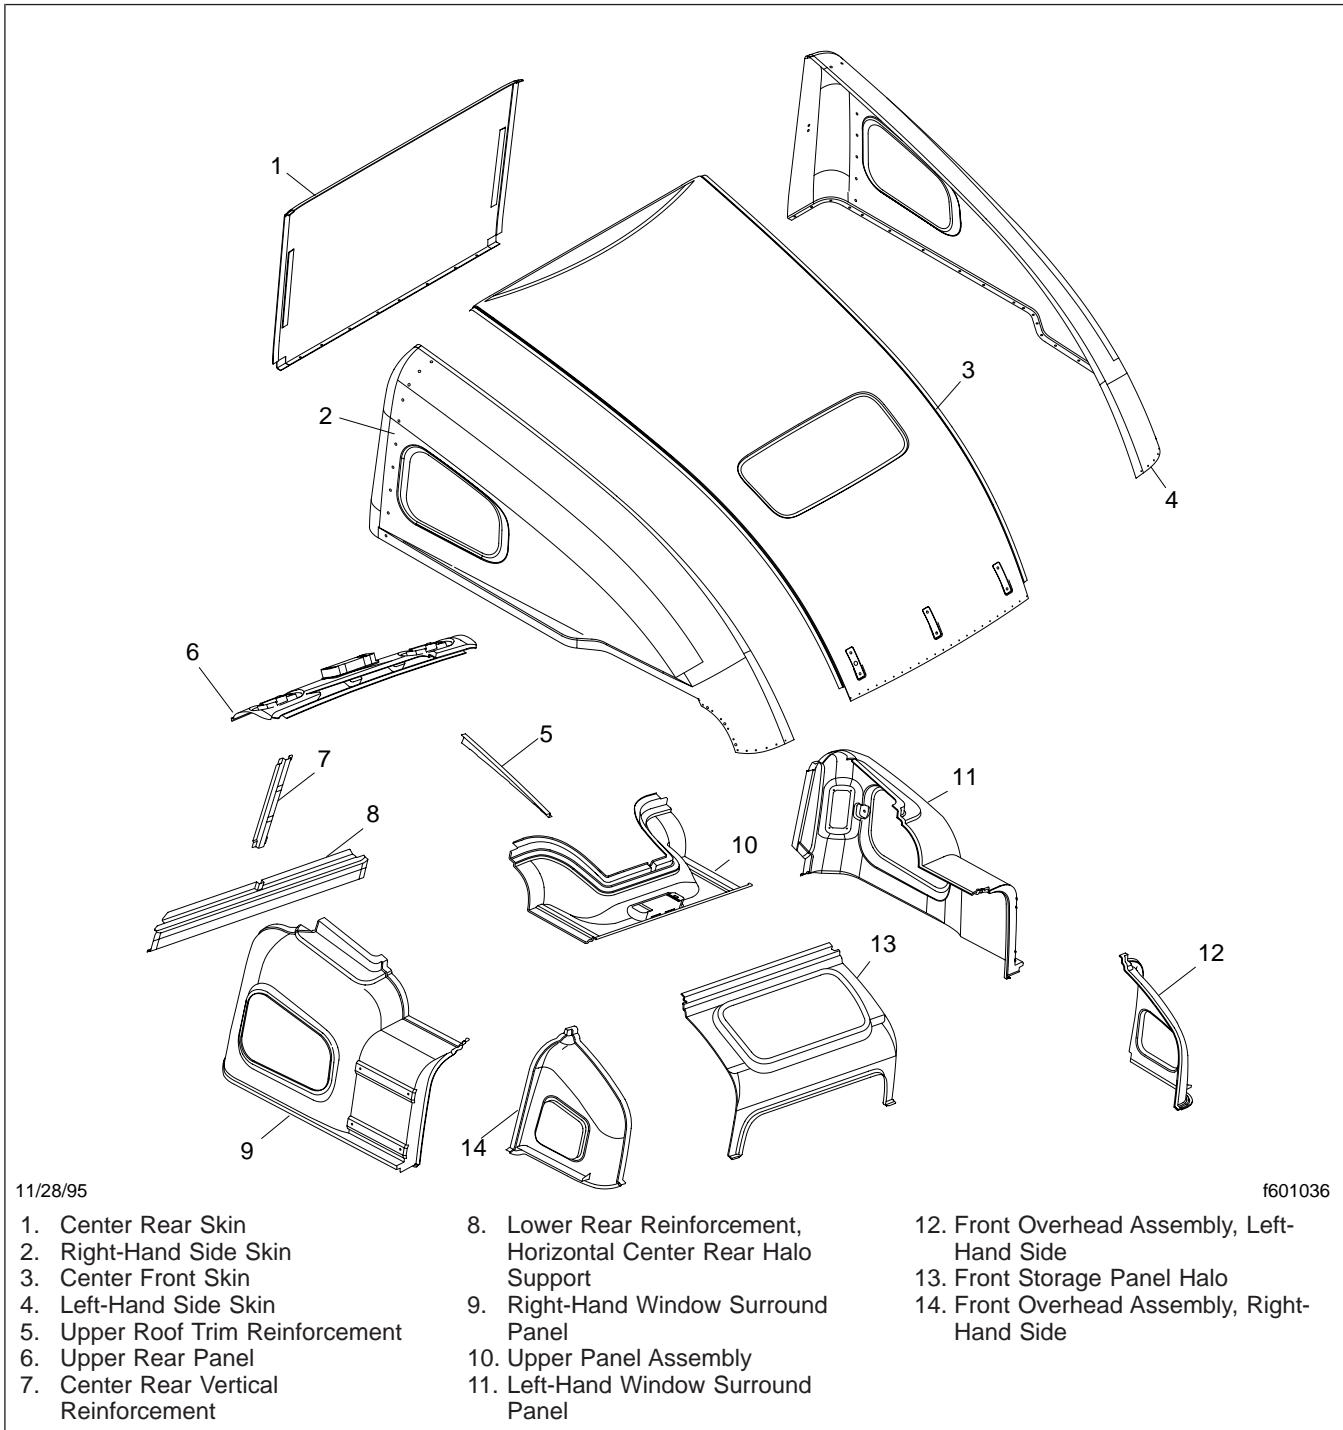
, Roof Cap Assembly Components (SleeperCab shown)
